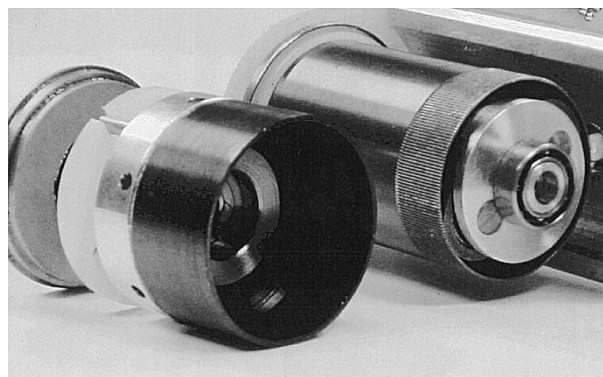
Partially disassembled harmonic lifter mechanism, showing the slip clutch and circular spline on the left and the flexspline with planetary rollers on the right. The motor is located inside the flexspline.
